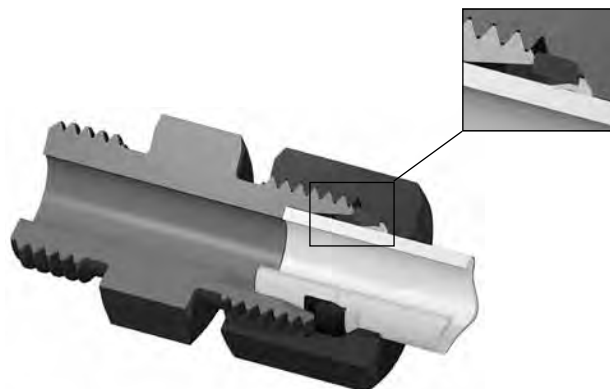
EO-2: The metallic support of the sealing ring acts just like an integrated preassembly tool.
